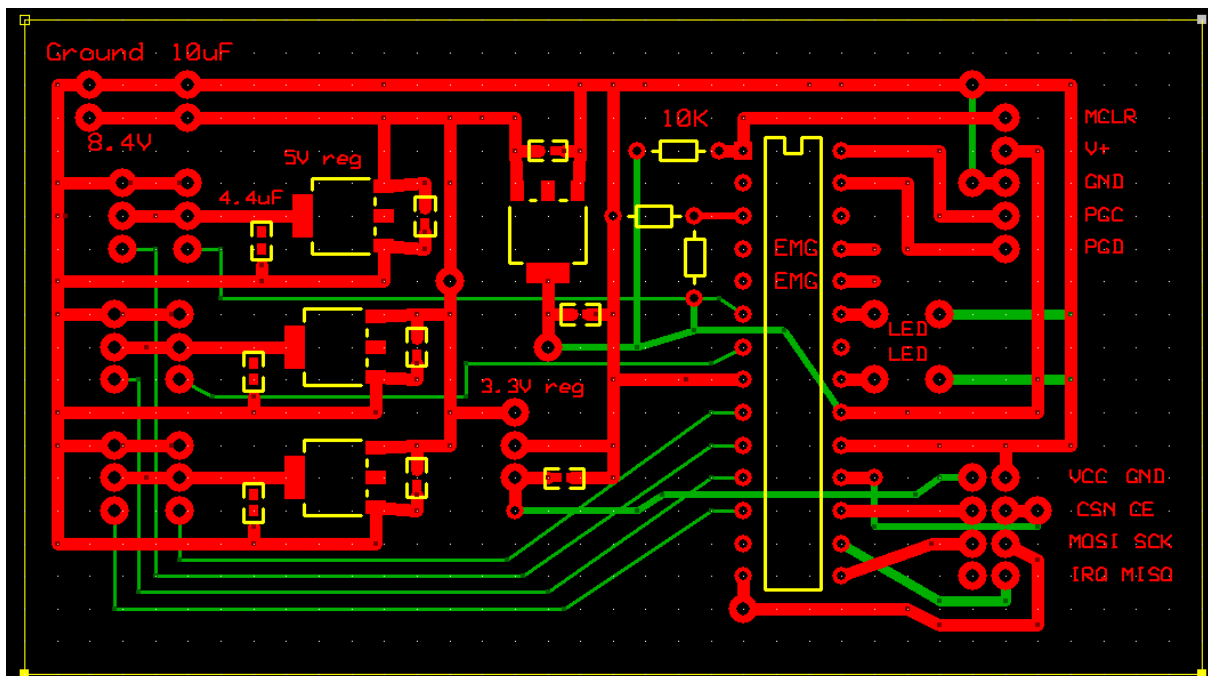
Printed Circuit Board design. Made using ExpressPCB
